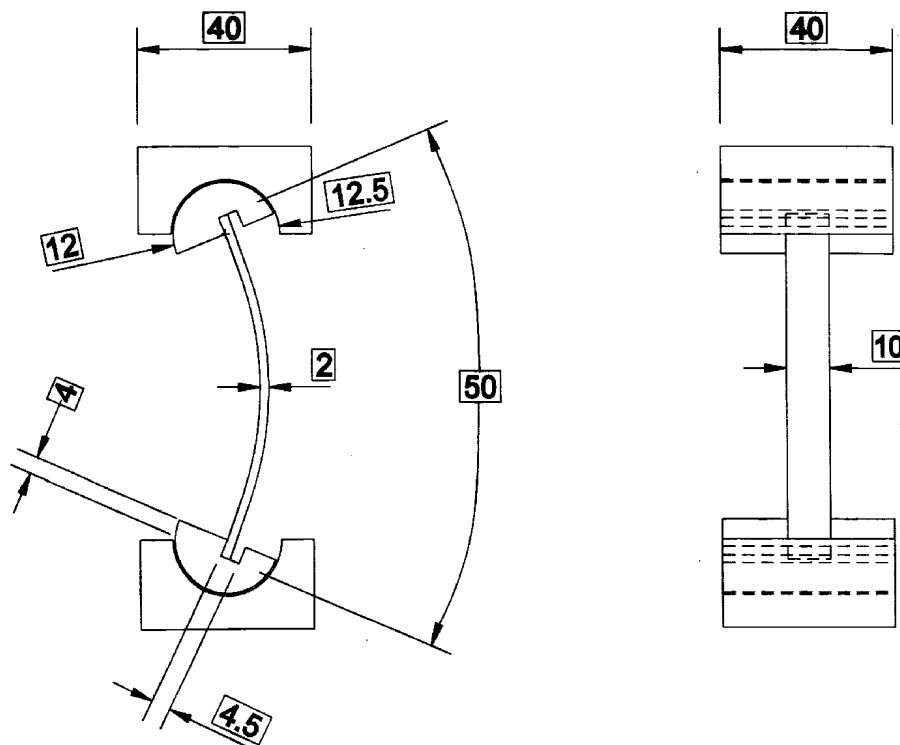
Medium sized pin-ended buckling rig and specimen (dimensions in mm)
